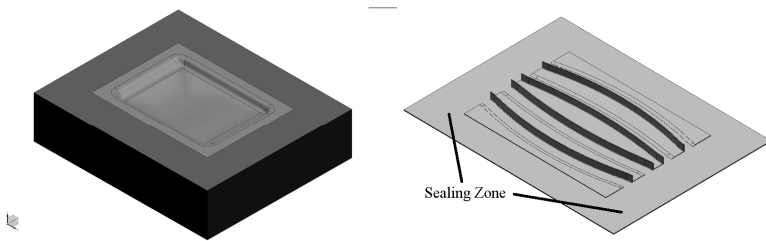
Tool Design (simplified, right) and Sheet Blank Design (right)
